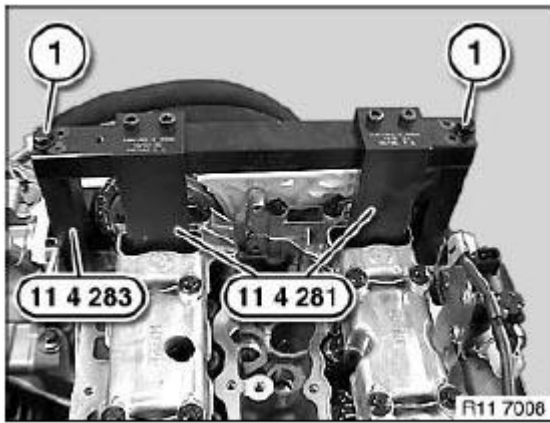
Identifying Special Tools 11 4 283 And 11 4 281
